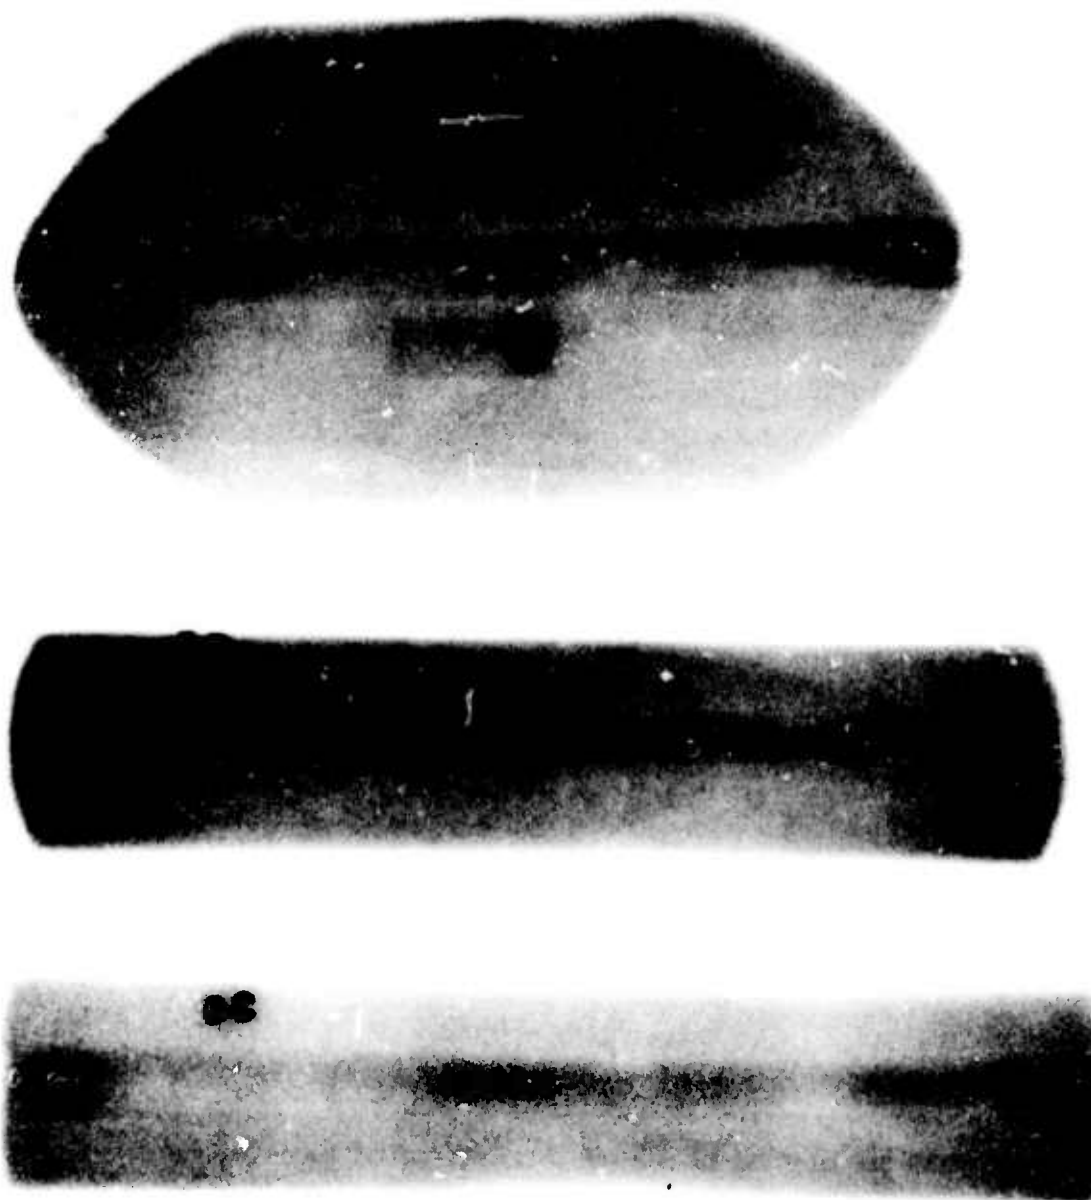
23 -Photographs of GTA weld radiographs
